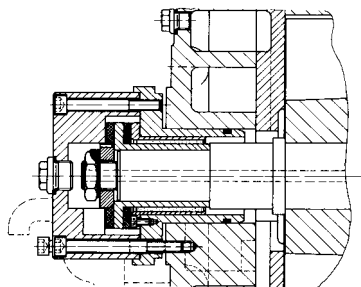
Casing-impeller clearance adjusting device (factory drawing of Lederle-Hermetic)
